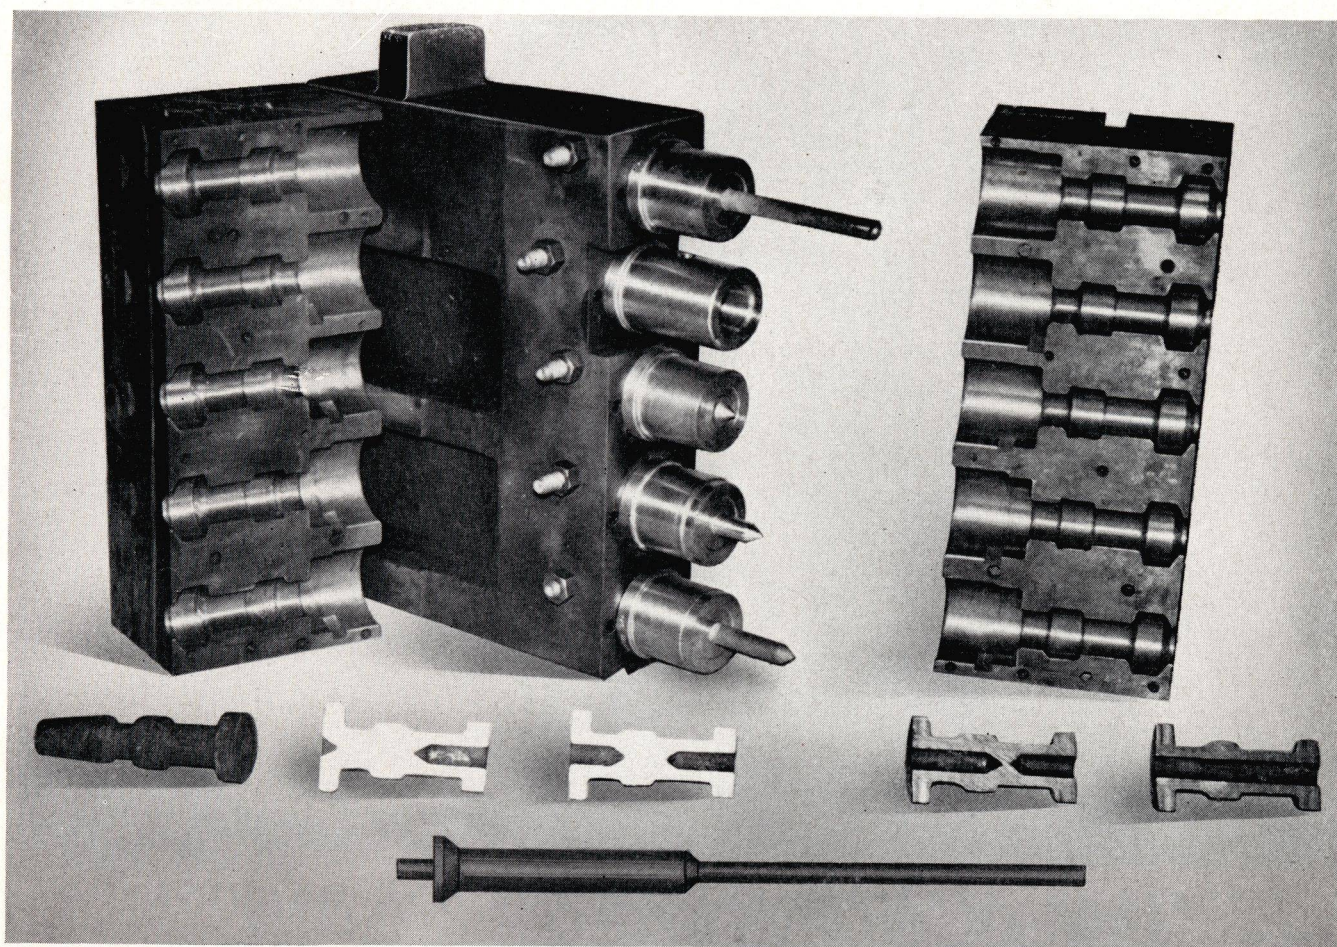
Dies for upsetting and piercing opposite end of cluster gear.
